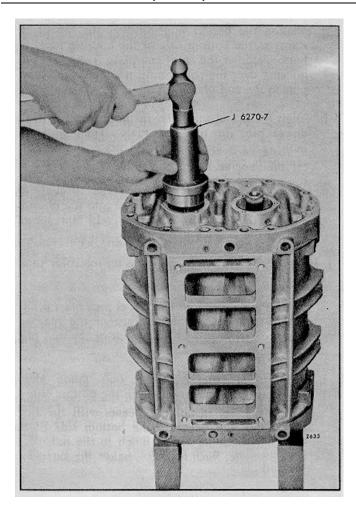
Installing Ball Bearings on Rotor Shafts and in Rear End Plate
